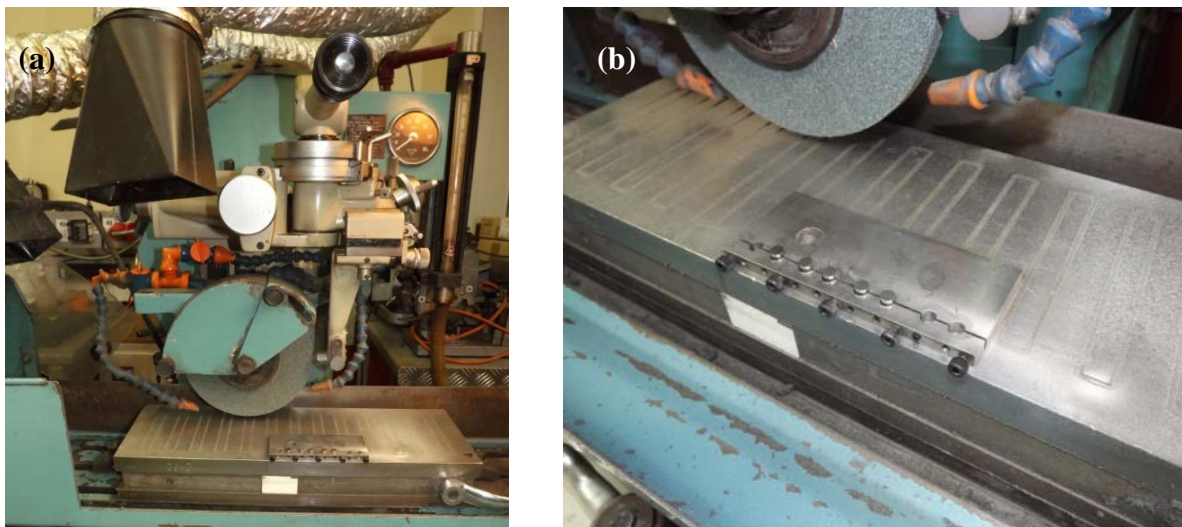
(a) Jones & Shipman surface-grinding machine, (b) Custom made jig to hold the cylindrical Inconel 718 samples.
